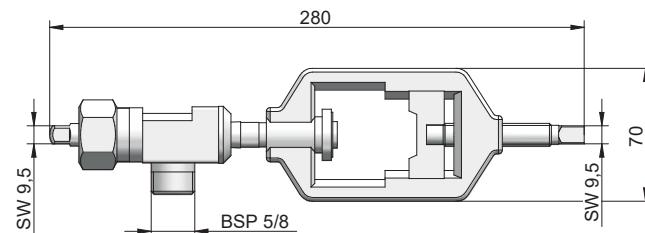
Auxiliary valve with YOKE connection [CGA V-1 (820)]
